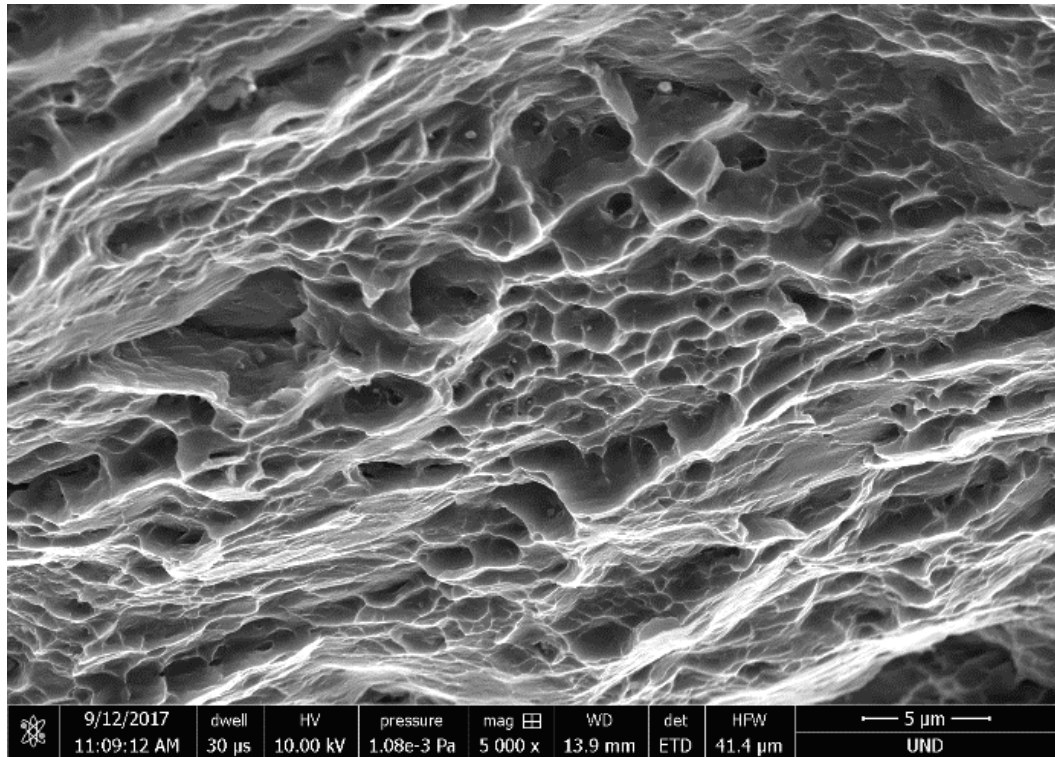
SEM fractograph showing considerable ductile-dimple structure in the eutectic in the fracture surface (1530 RPM, and 220 mm/min).
